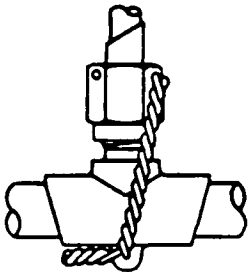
Fittings incorporating wire lugs shall be wired as shown in Figs. 18 and 19.
